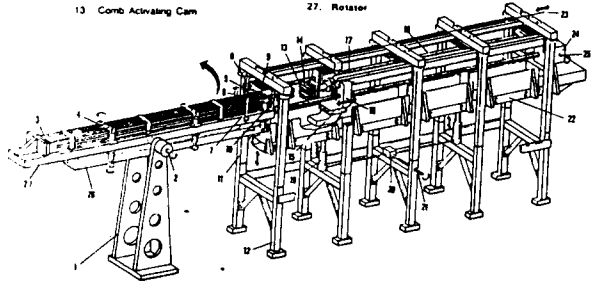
Horizontal Rod Consolidation Machine (Westinghouse Inc.)
